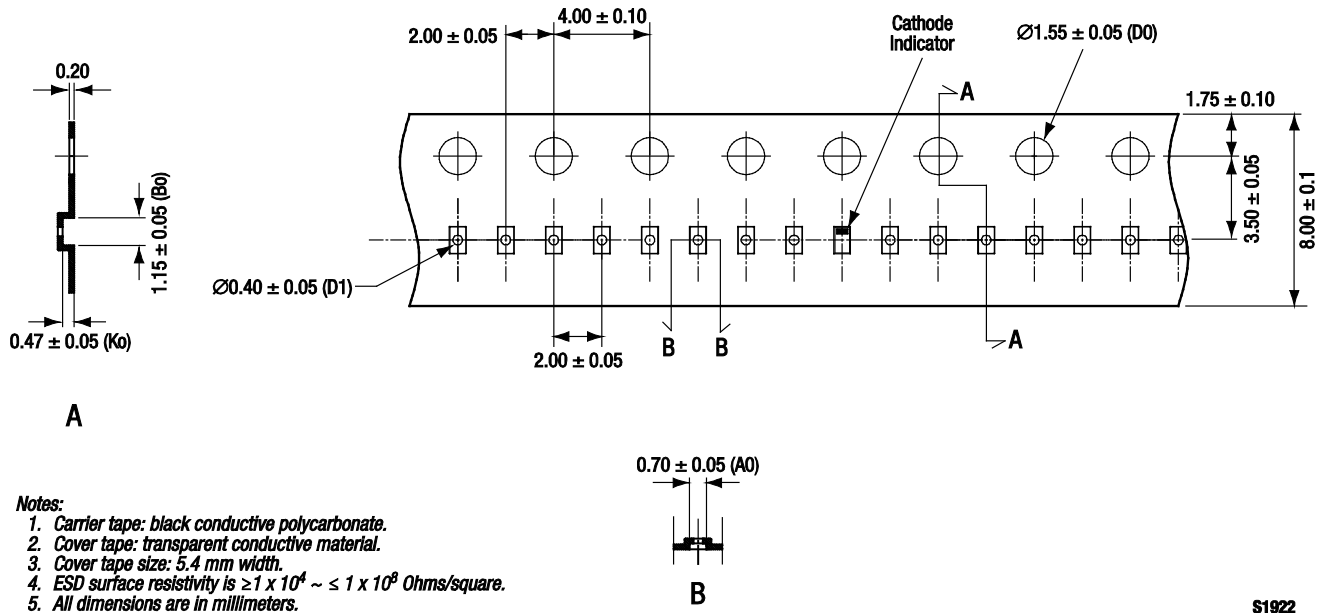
SMV1430-040LF Tape and Reel Dimensions
